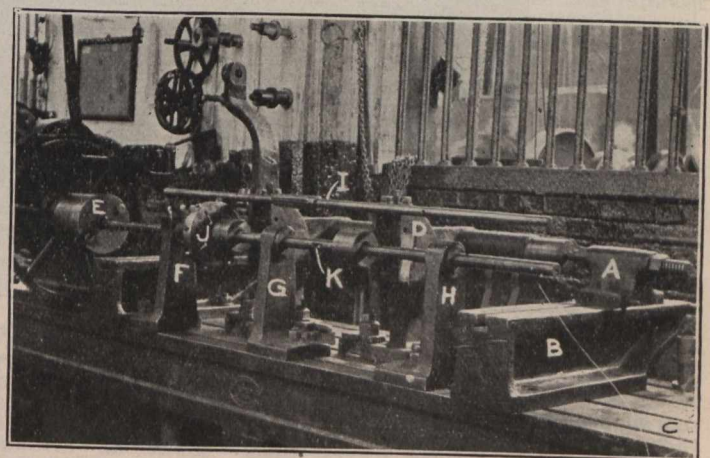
Machine for Finishing the Tumbling Shaft Arms.
